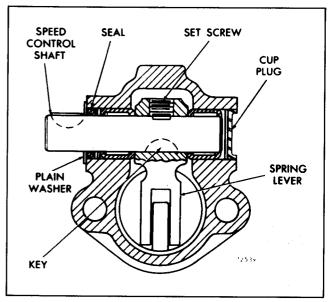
Cross Section of Governor Spring Housing and Lever Assembly
